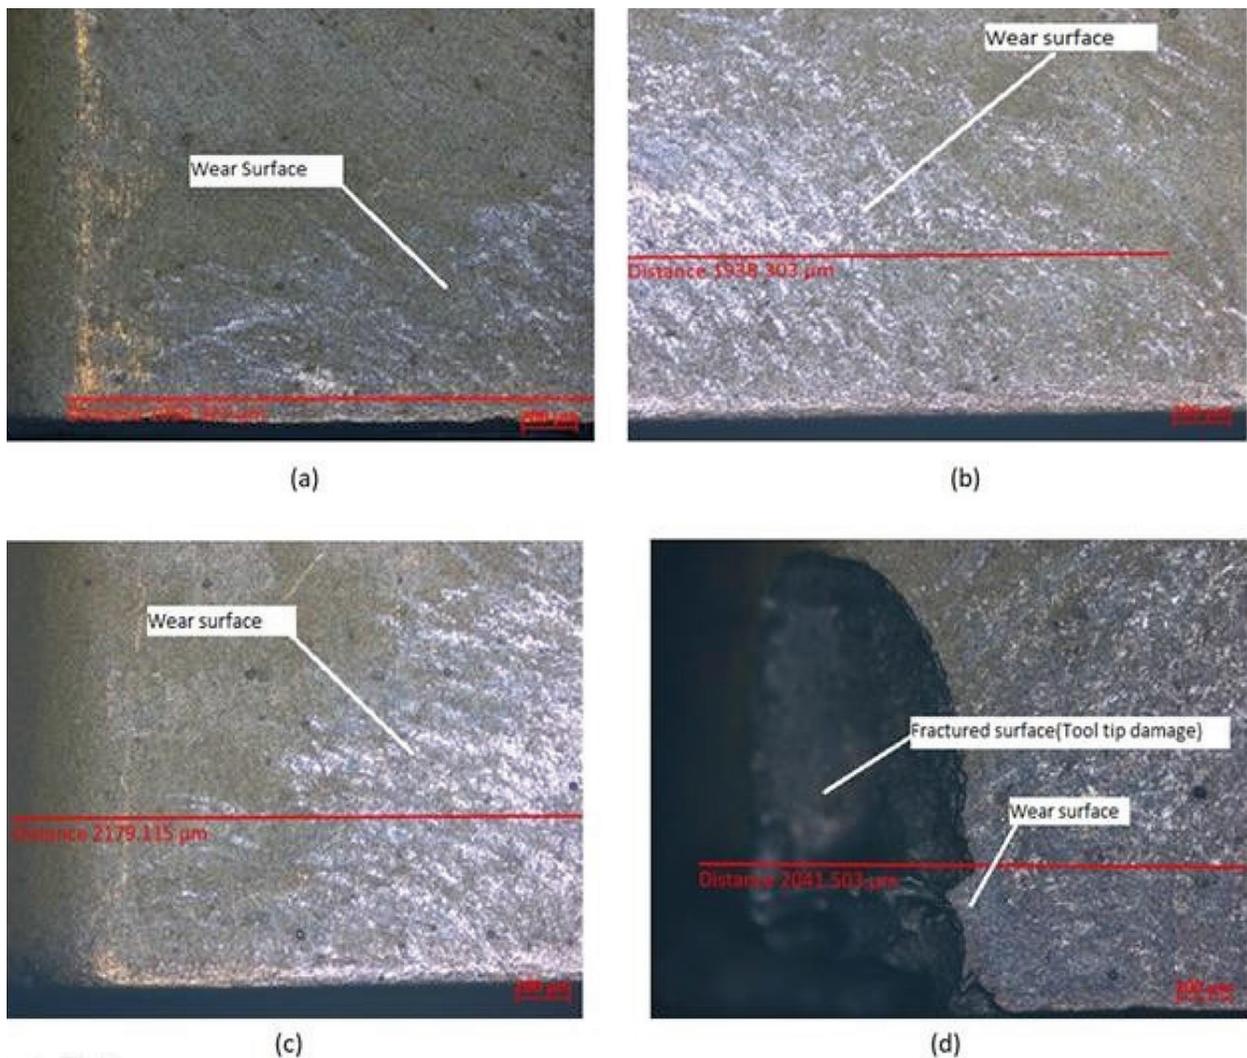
Microscopic image of tool wear surface: (a): worn-out surface of a coated tool insert used to machine C45 steel with a higher concentration of phosphorus and sulphur. (b): worn-out surface of a coated tool inserts when cutting C45 steel with a low phosphorus and sulphur content. (c): worn-out surface of an uncoated tool insert used to machine C45 steel with a higher percentage of phosphorus and sulphur and (d): worn-out surface of an uncoated tool insert used to machine C45 steel with a low sulphur and phosphorus content.
